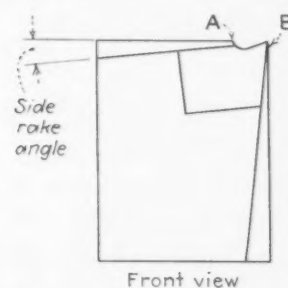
The effect of side rake angle on the acuteness of the cutting edge should be taken into account when grinding a chip breaker groove in a steel cutting carbide tip.
